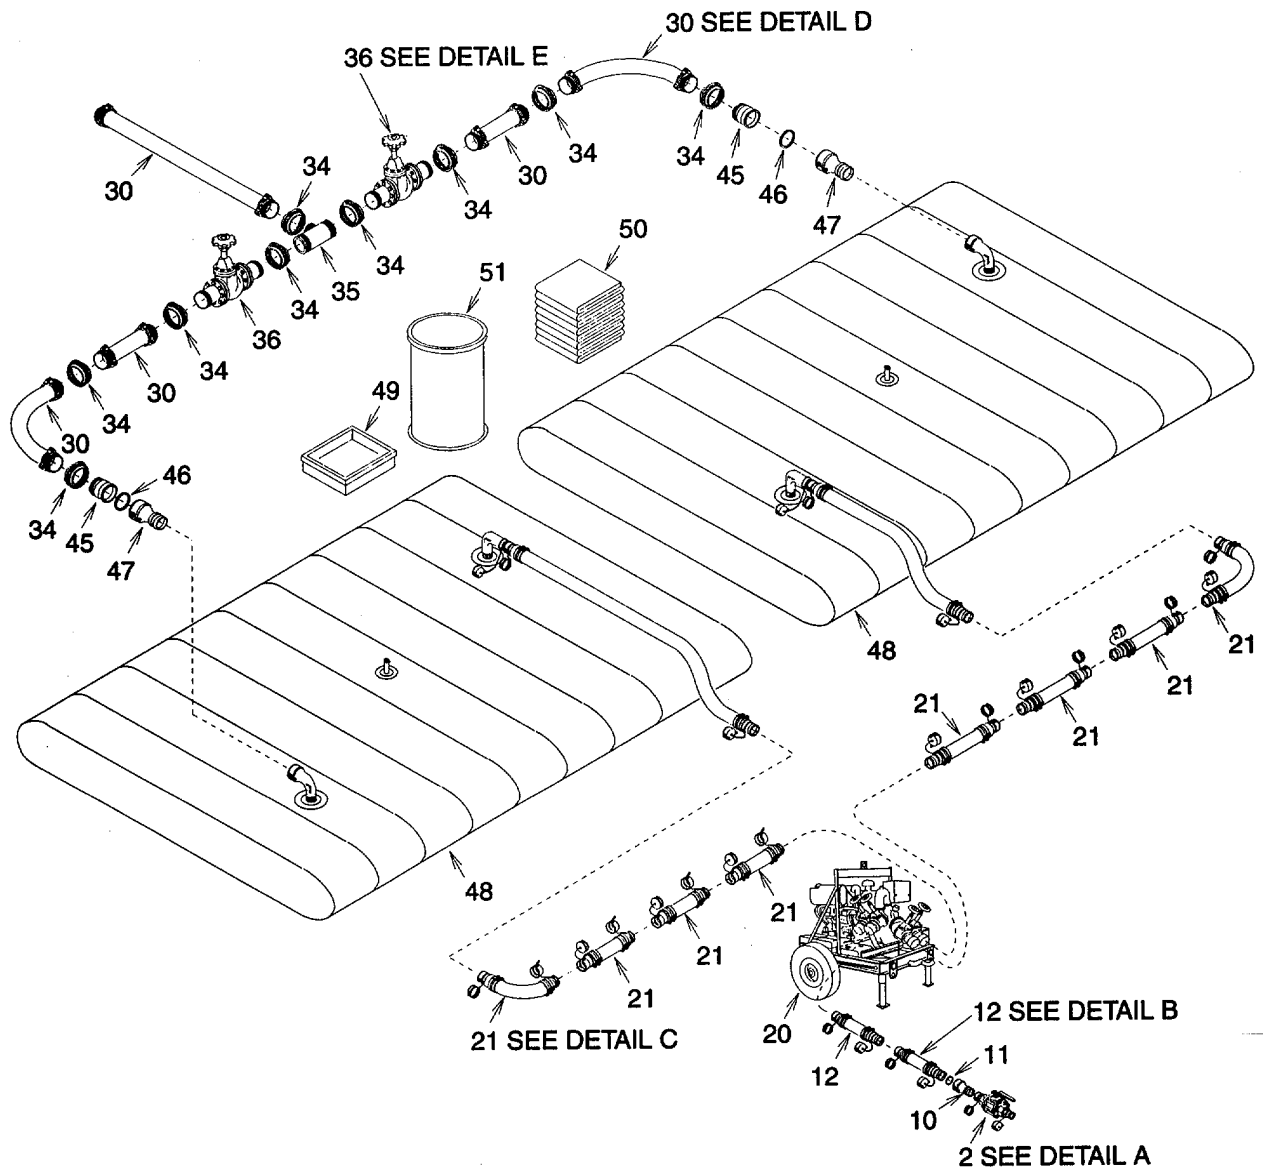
Contaminated Fuel Module (Sheet 1 of 2)
